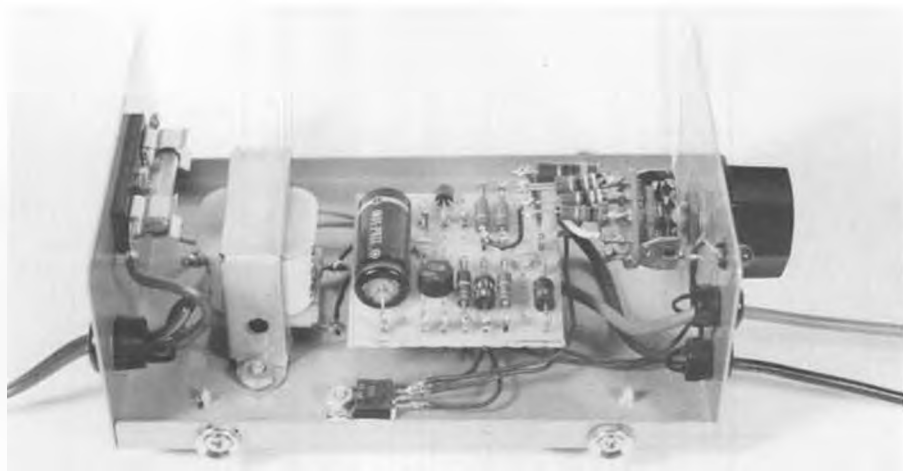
Interior of charger with all components mounted and wired. Perfboard provides the convenience of a printed circuit board, but without the complications of fabrication.
